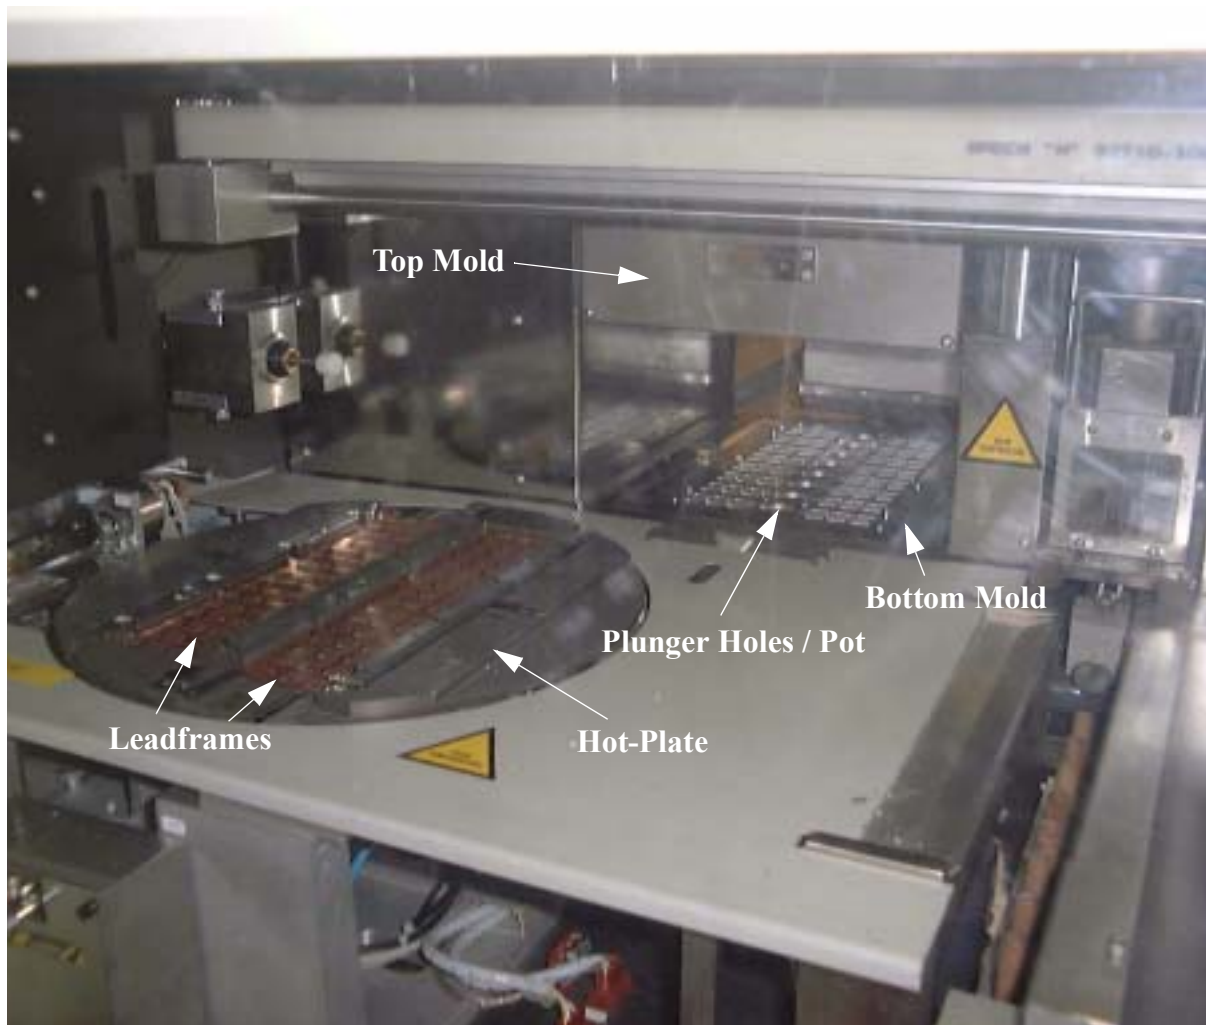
A modern Transfer Moulding machine with a hot-plate for preheating leadframes.
